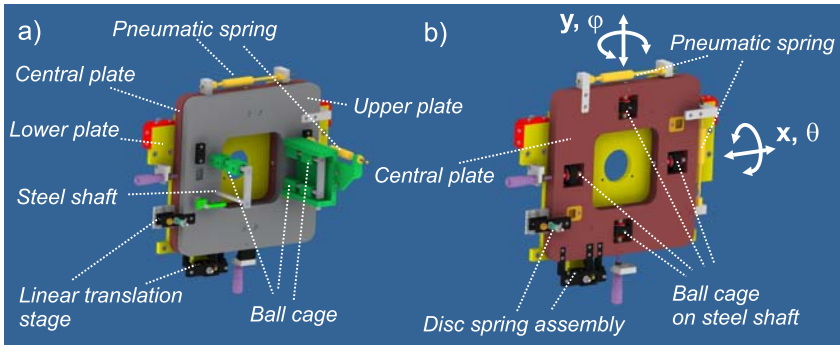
Details of the positioning unit: a) Parts of the z-translation stage removed in order to provide a view on the ball cages and the steel shafts. b) Upper plate removed to reveal the view on the gimbal.
